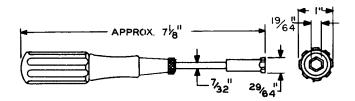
KS-6263 Screwdriver-Handle Hex Socket Wrench
